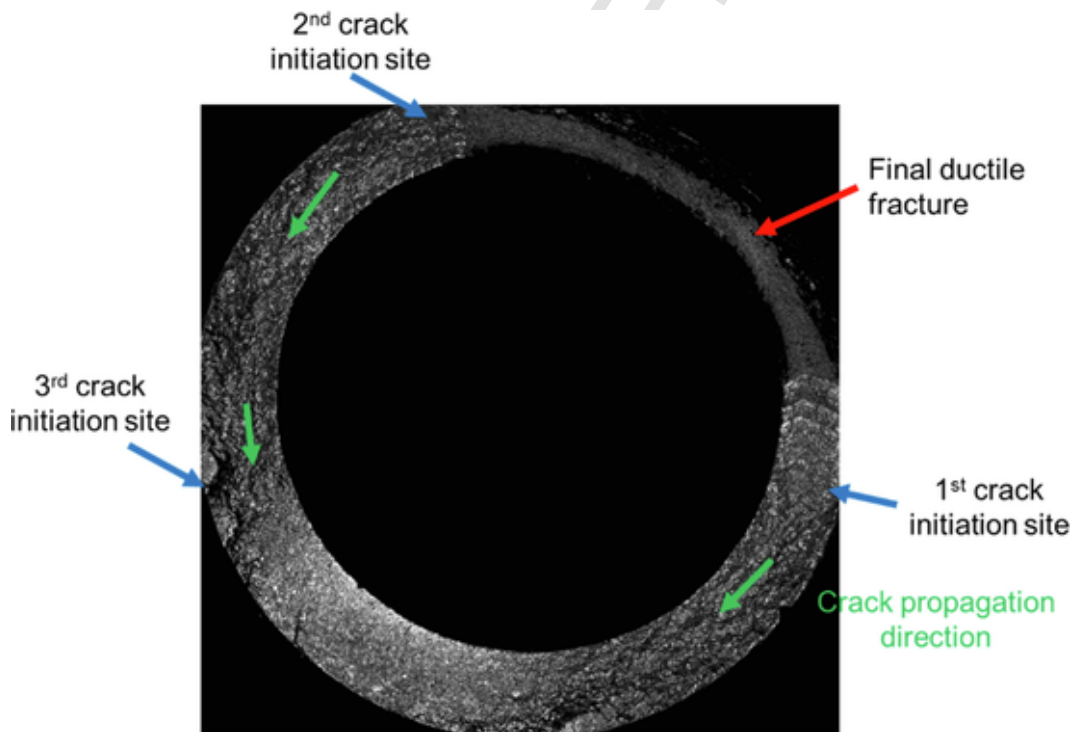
Crack initiation and propagation regions identified on the fatigue fracture surface using the fracture events revealed by FAPPs.
